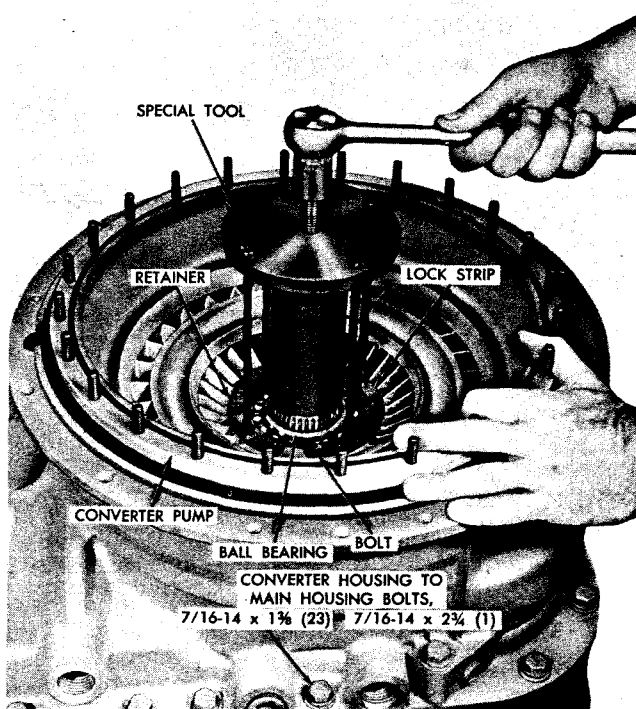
Removing converter pump, input accessory drive gear and bearing
